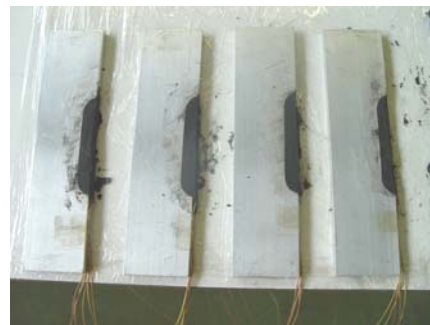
Thermal couples that are placed in work piece dimensions of 200x50x7.8 mm
